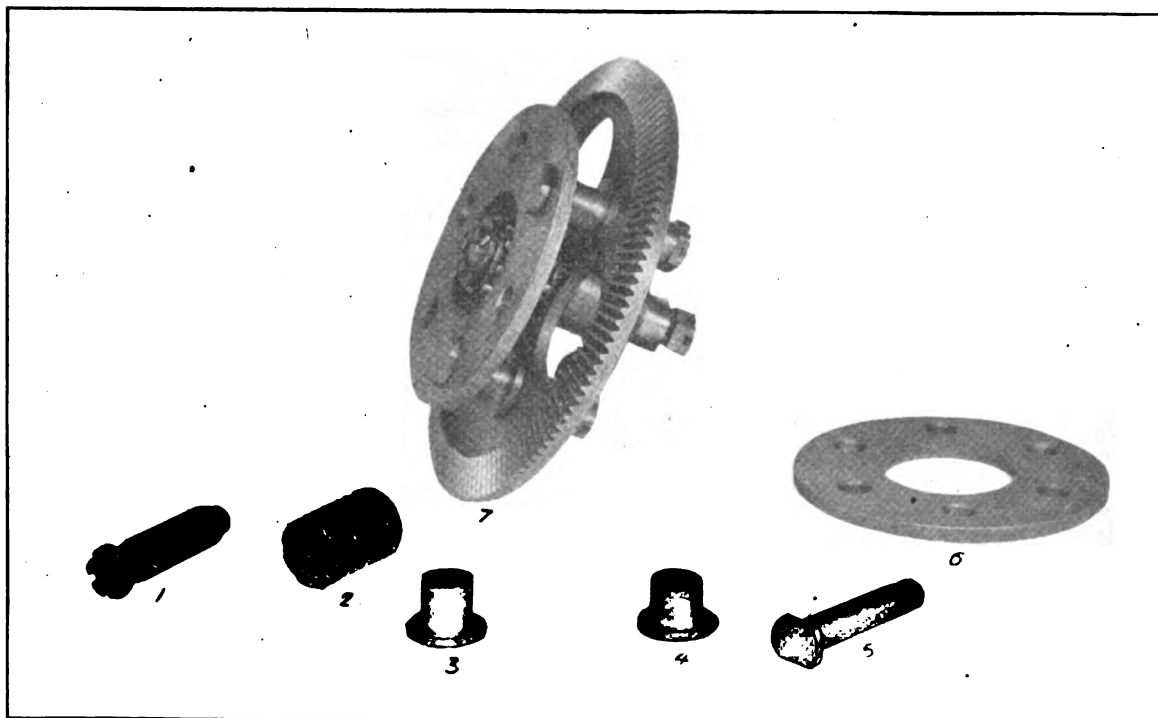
Bijur (rear end) starter, bevel and idler gear parts
